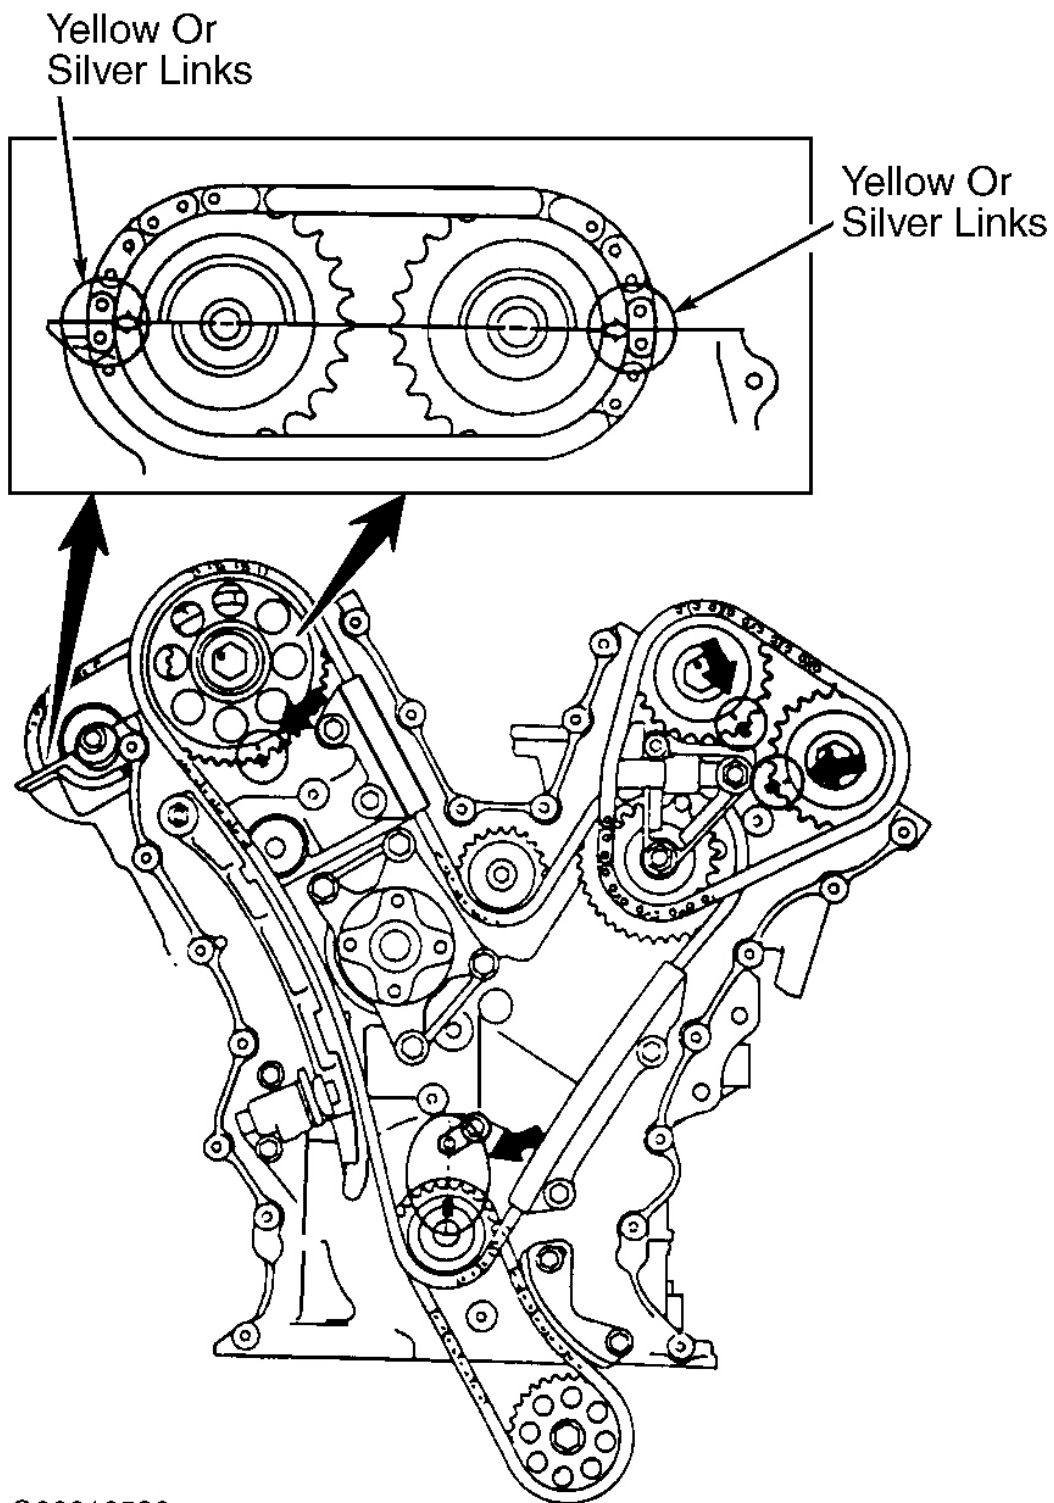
Aligning Right Bank Timing Chain & Camshaft Sprockets Marks
